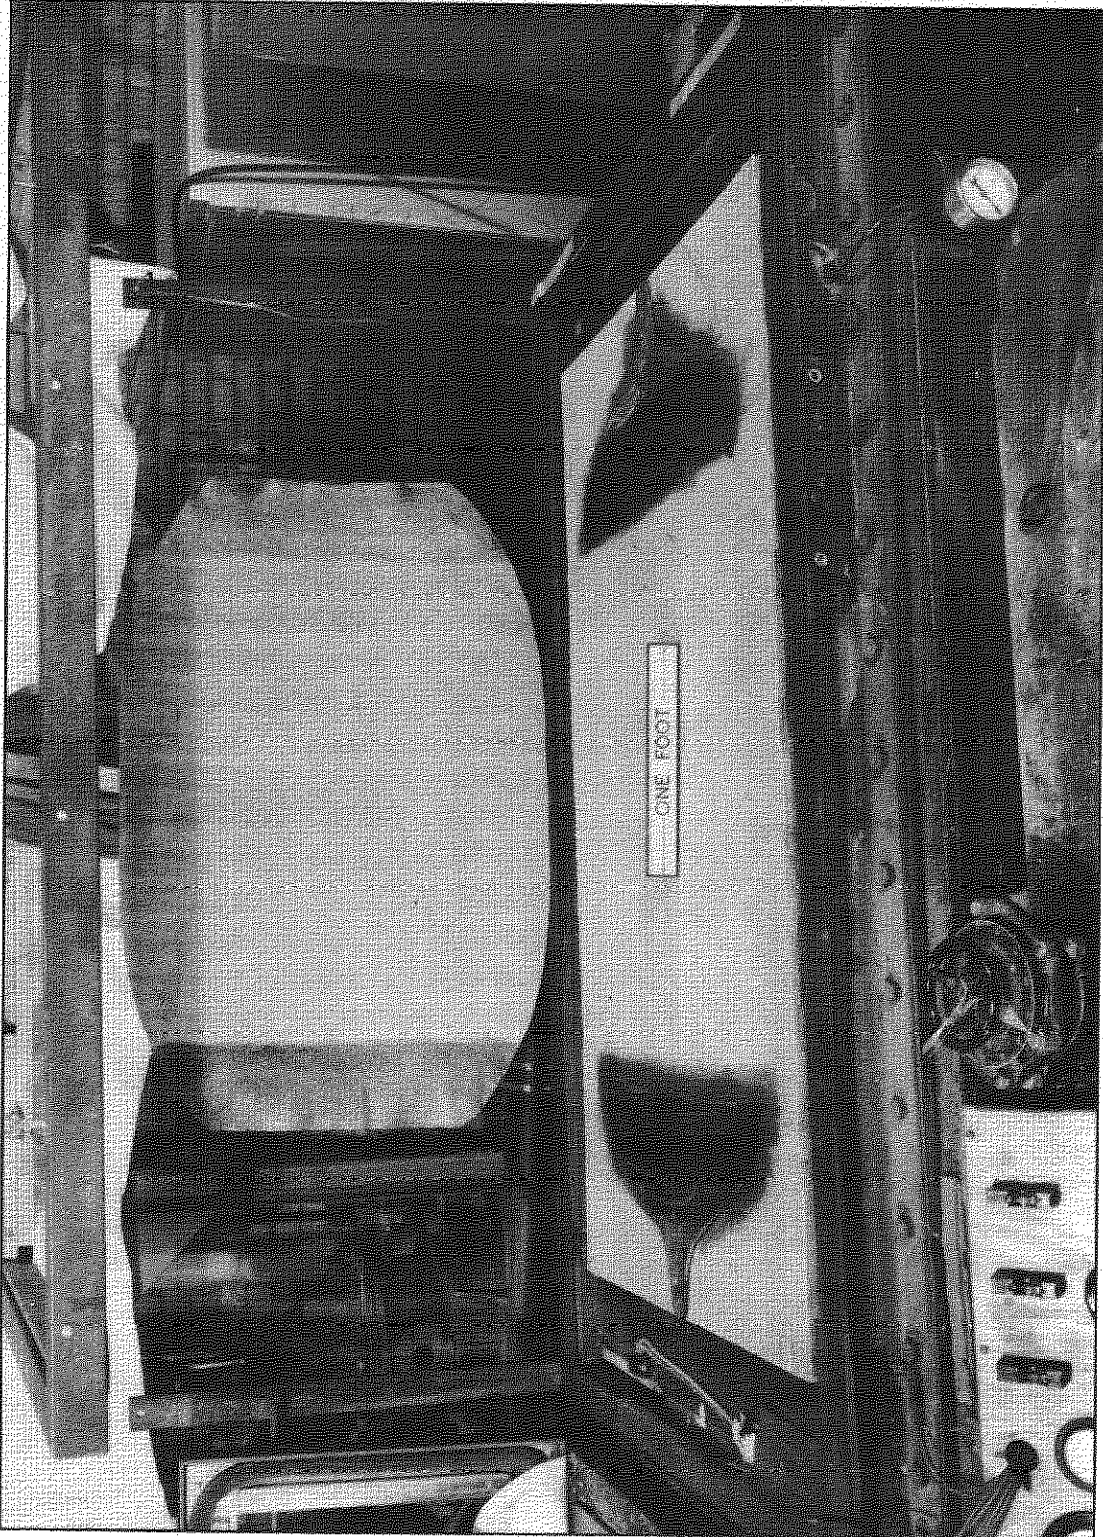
PANEL ASSEMBLY SHOWING INTRODUCTION OF GLUED INSERTS
